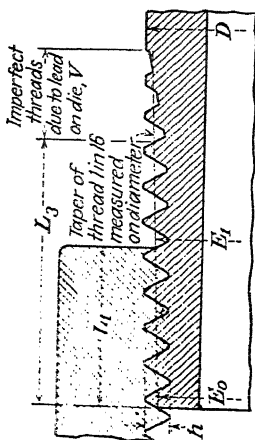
Long screw joint between straight threaded coupling and straight and taper threaded pipes.
